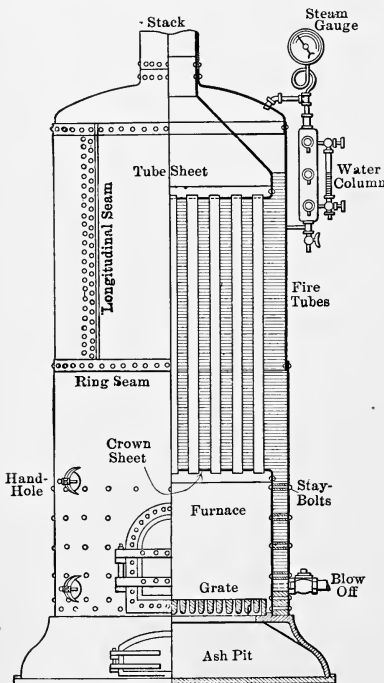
Vertical Tubular Boiler with Submerged Tube Sheet.
